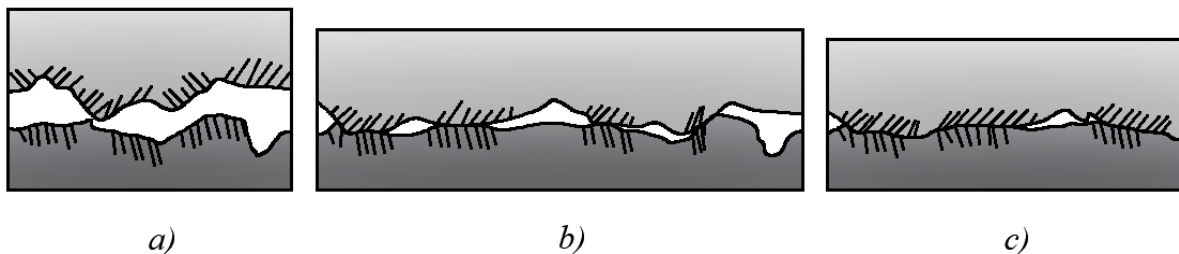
Schematic illustration of a model for bonding mechanism in cold welding with a) Scratch brushed surface; b) extrusion of virgin material and c) bonding (drawing based on Bay et al. ^[120])
